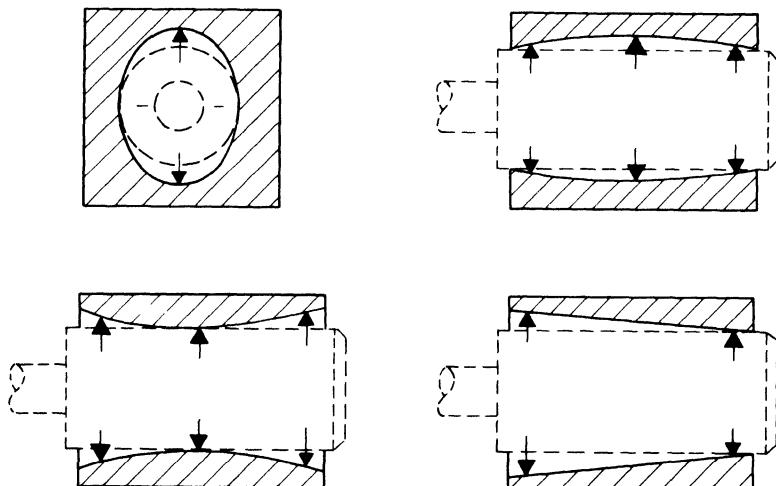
Various hole conditions which a conventional plug gage will not indicate but which may be explored with indicating-type gages.
